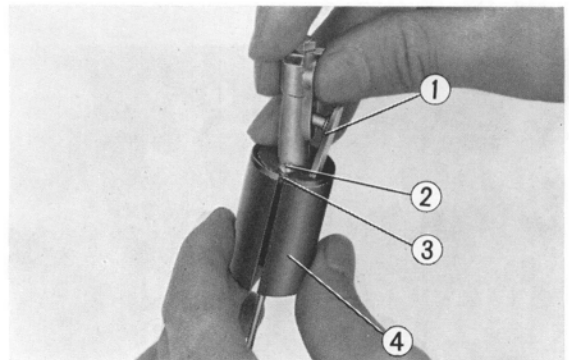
① Valve plate ② 3 mm screw ③ Spring washer ④ Throttle valve
